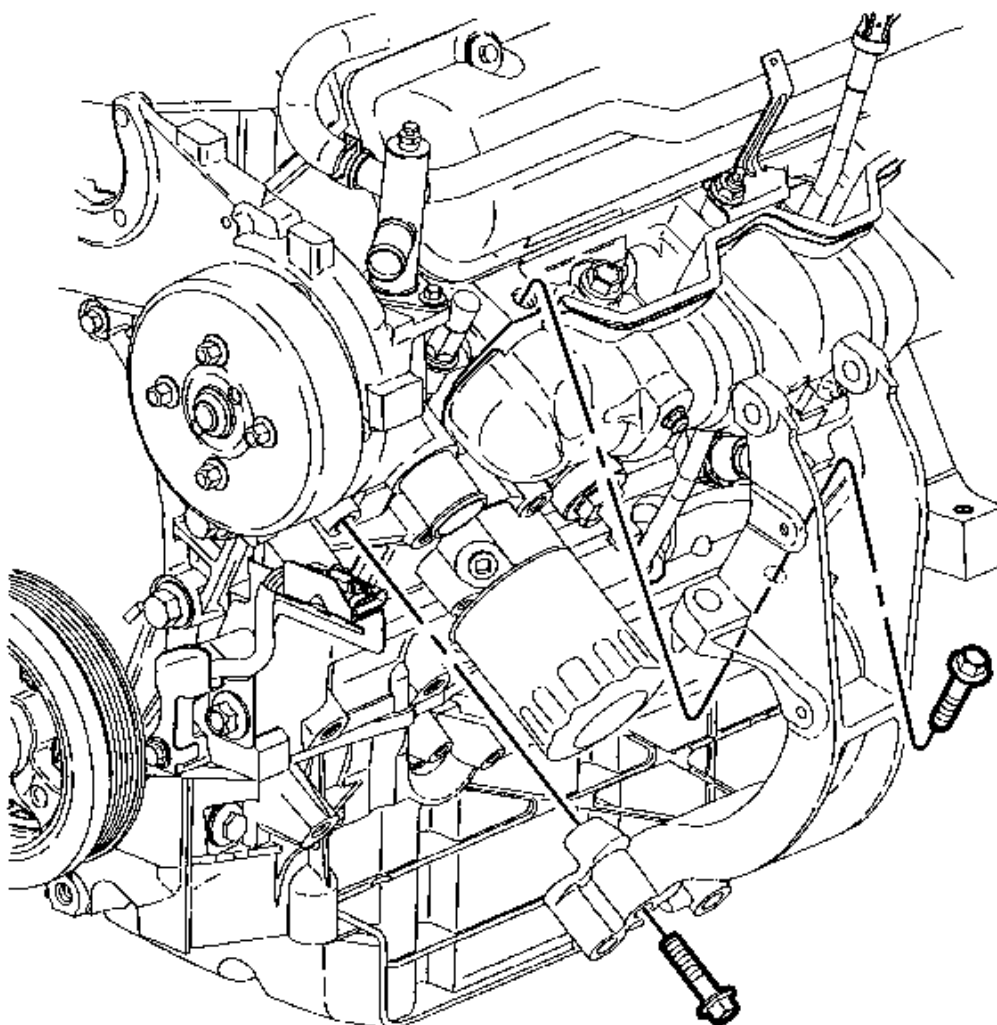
View Of Engine Mount Strut & Air Conditioning Compressor Bracket
